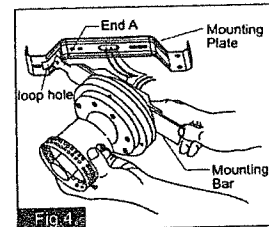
Attach hang motor assembly onto mounting plate. Insert the End A of mounting bar through the loop hole of the mounting plate for hands-free wiring. (See fig4-1 and fig4-2)
